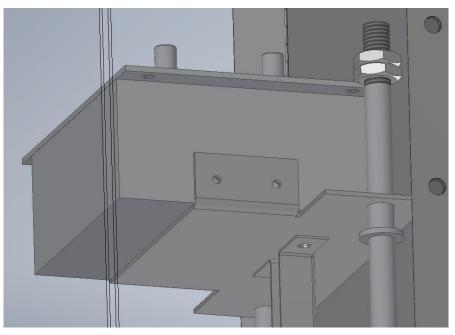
Alignment Rods and Connection to the Lower Part of the Disconnector
